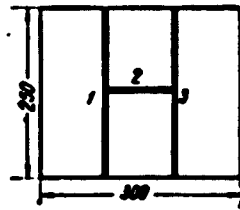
H-shaped specimen used to determine crack resistance of seam.
